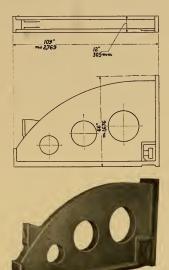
Planer Housing Casting—Weight 5000 pounds.
